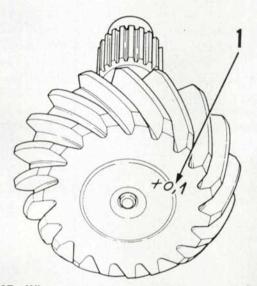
When renewing bevel ring gear and pinion, compare variance measurement (1) scribed on end of new and old pinion and refer to text for pinion engagement adjustment procedure.
